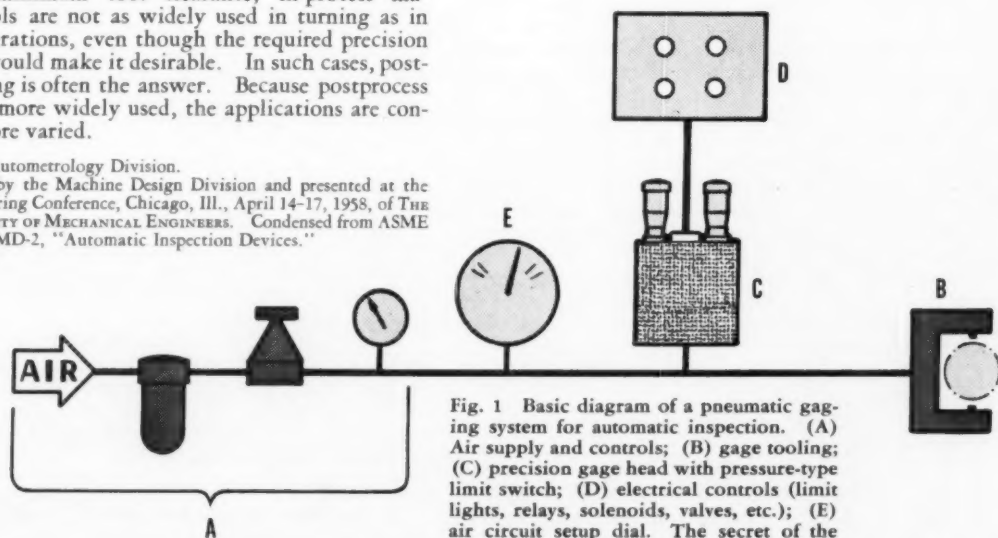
Basic diagram of a pneumatic gaging system for automatic inspection. (A) Air supply and controls; (B) gage tooling; (C) precision gage head with pressure-type limit switch; (D) electrical controls (limit lights, relays, solenoids, valves, etc.); (E) air circuit setup dial. The secret of the gaging tool (B) is an air jet at the contact point. The back pressure in the line becomes a measure of the clearance between gage and work.
